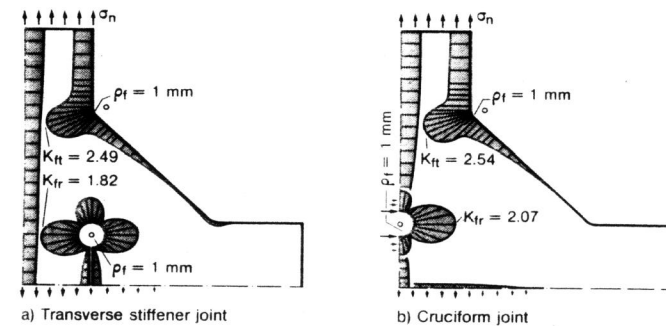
Notch stresses at transverse stiffener joint with fillet welds (a) and cruciform joint with double-bevel butt welds (b) subjected to tension loading, fatigue notch factors K_f for weld toe (index t) and weld root (index r), the latter uncorrected
